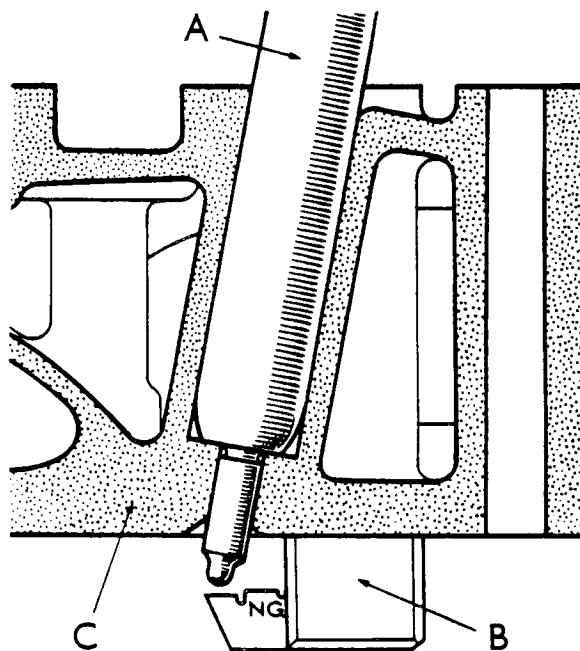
CHECKING THE CYLINDER HEAD BEFORE REFACING
